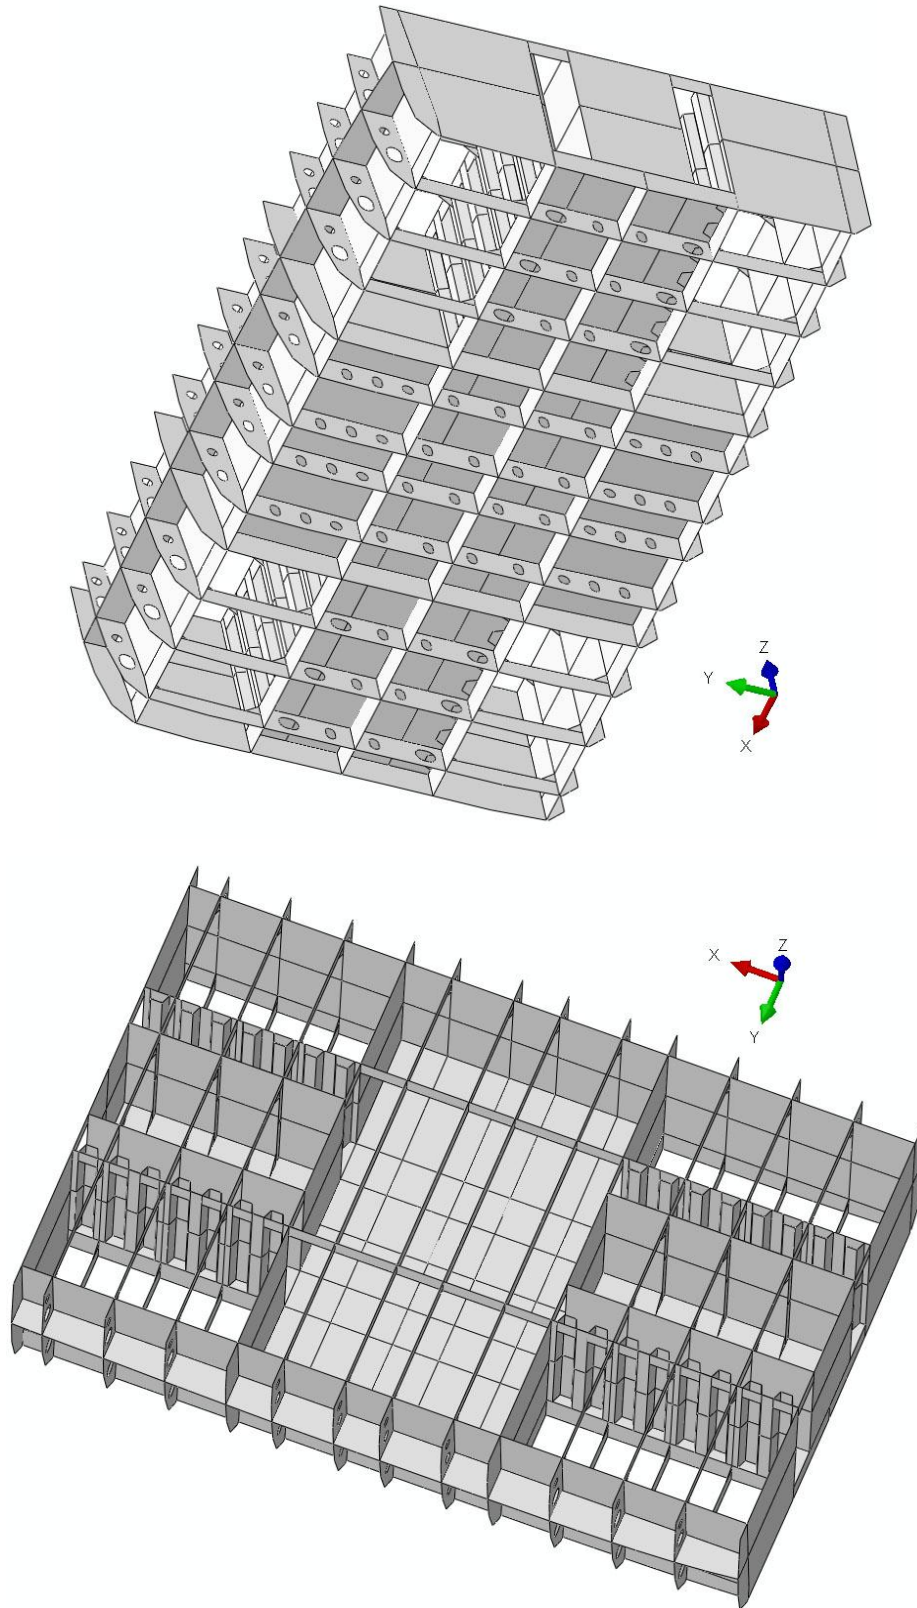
3D modelling PSV, Surfaces top and bottom view
